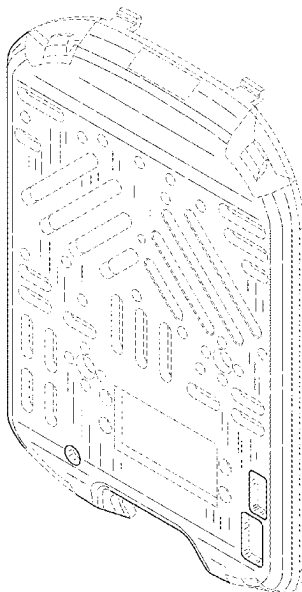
is a left side view of the mounting plate of FIG. 1.
